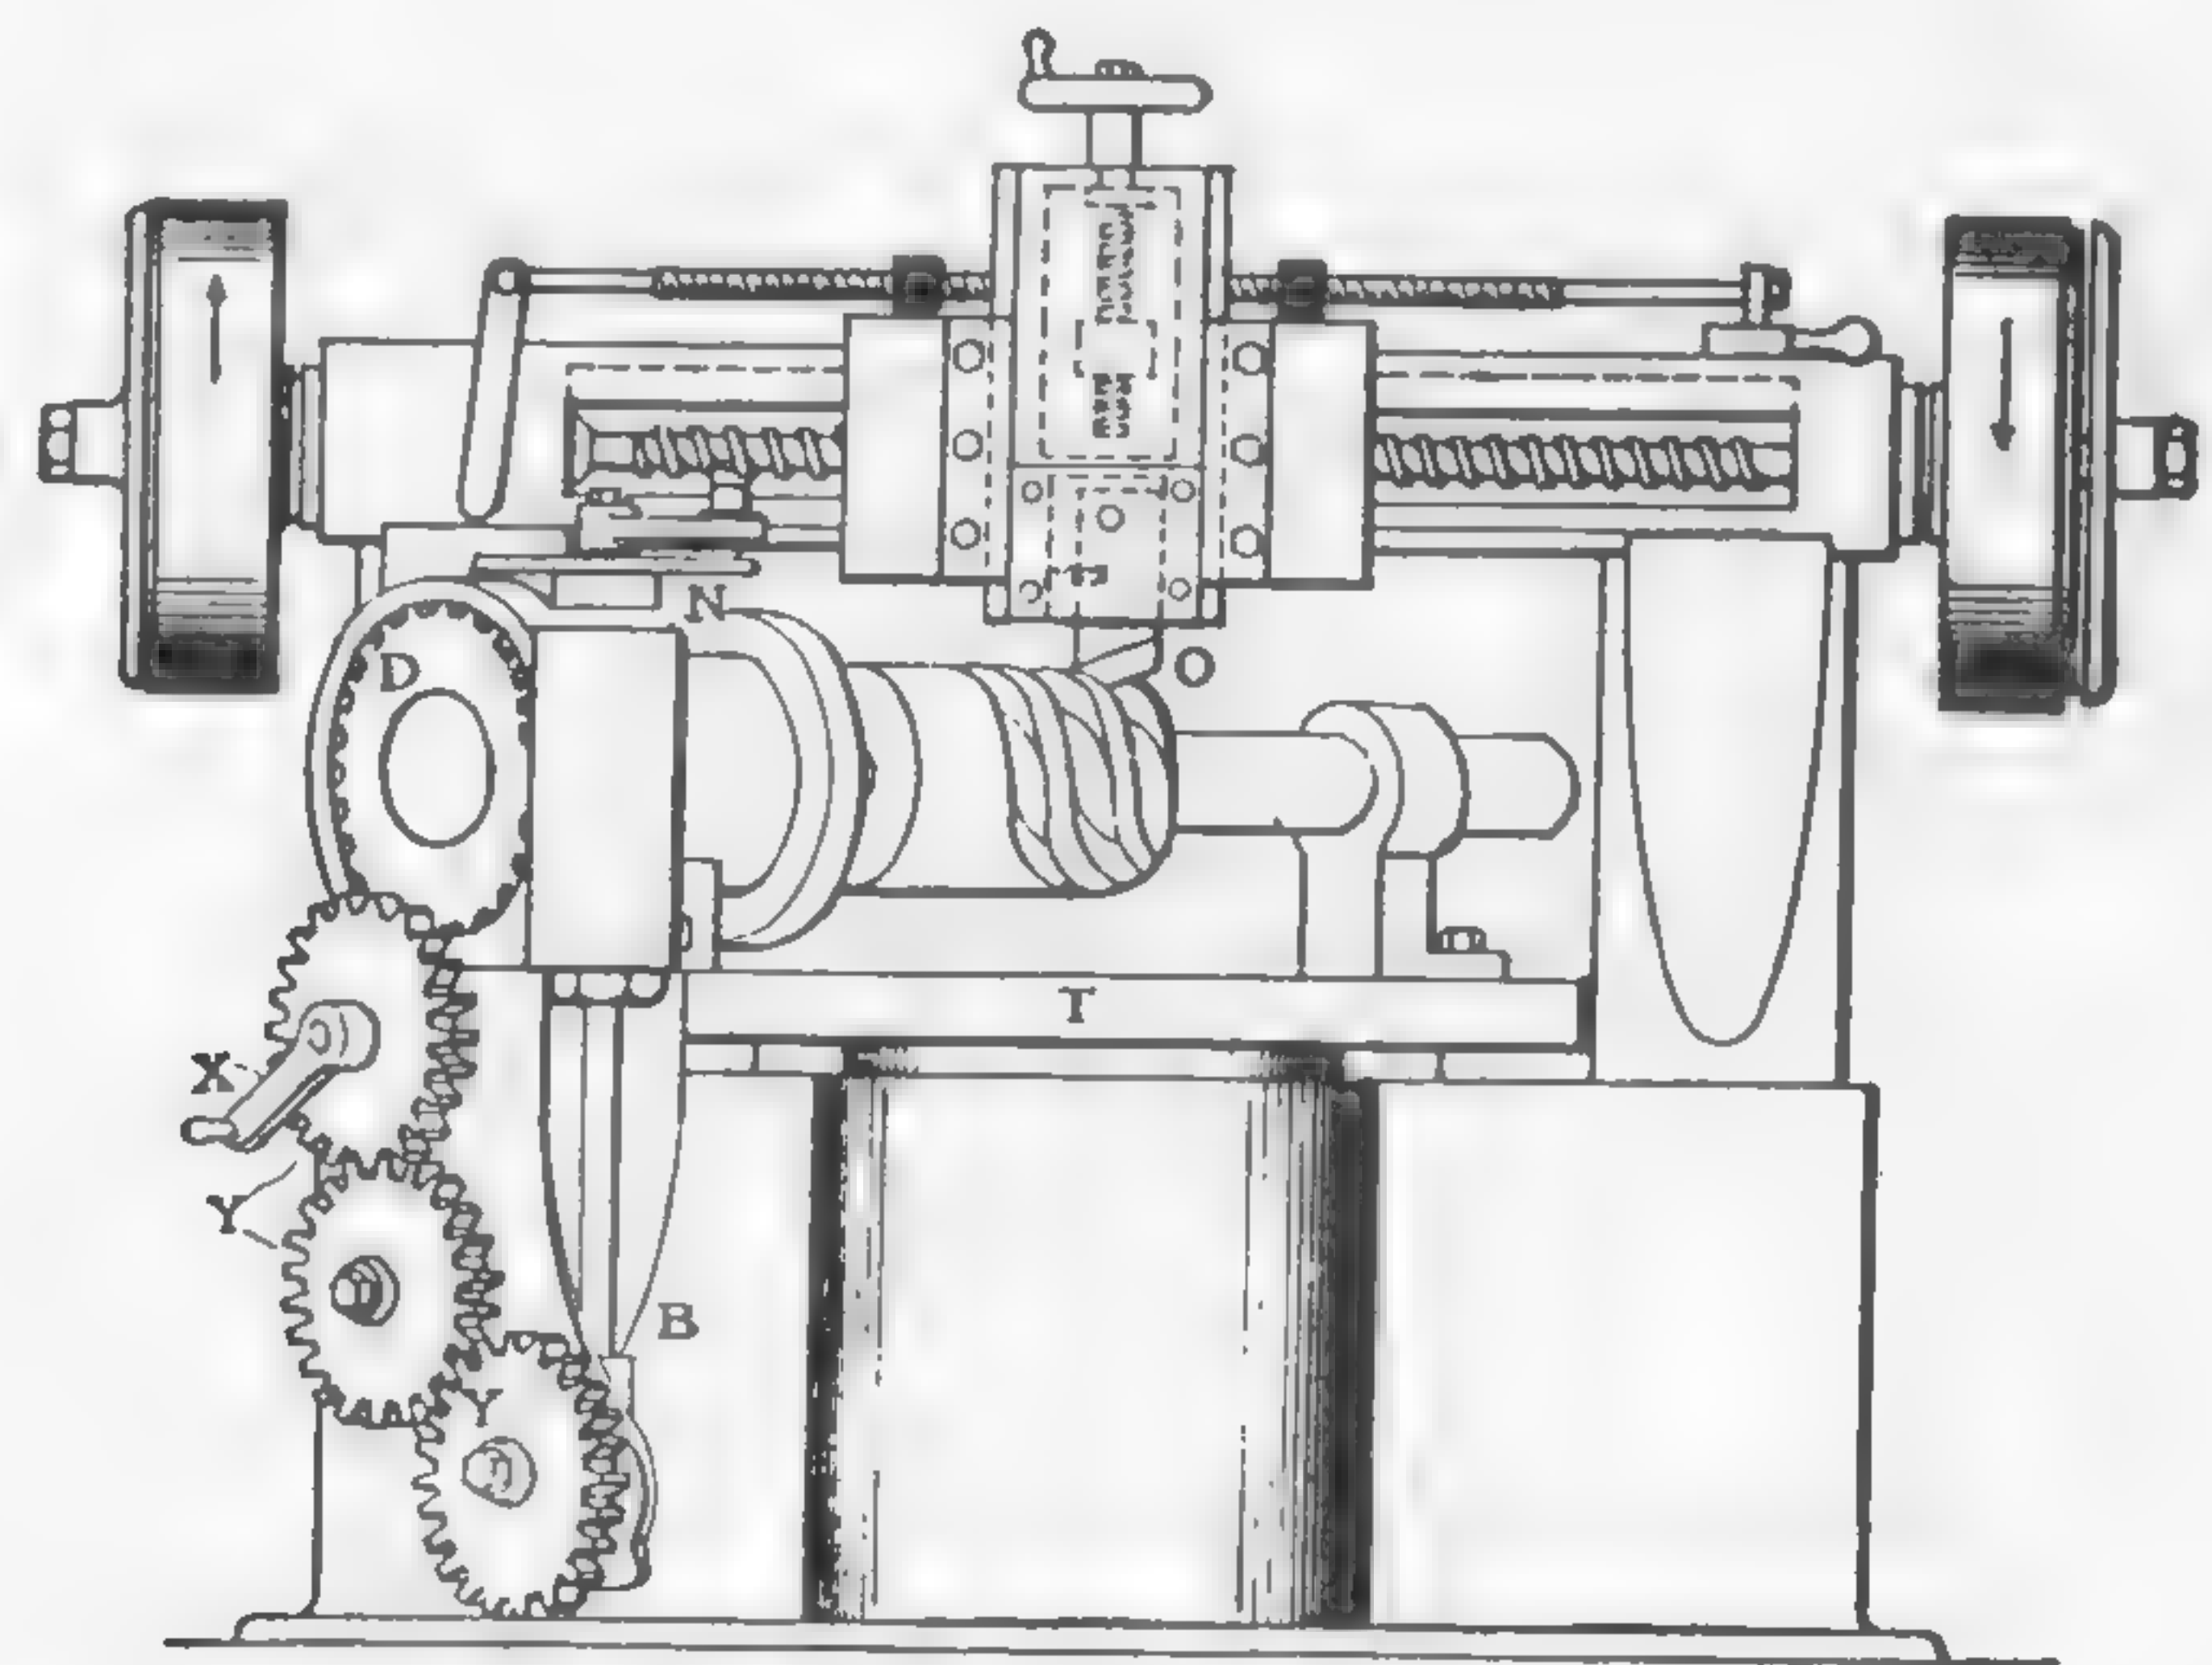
WALTER'S SPIRAL-GEAR GENERATING MACHINE, 1889 (*American Machinist*)
